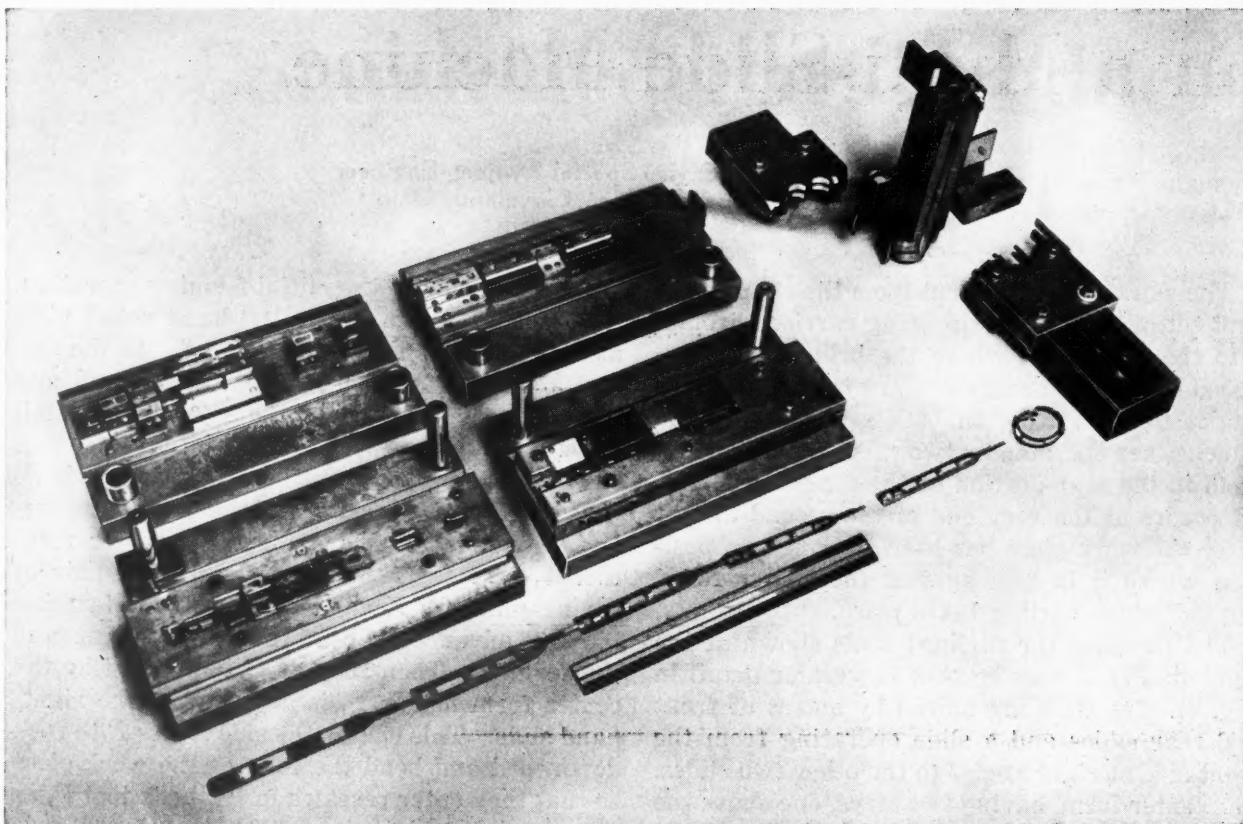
(Above) Complete tooling equipment used in producing the hose clamp. The two-level forming tools used to produce the final shape are shown at the right. In the foreground is seen strip as it appears in successive stages and after the part has been cut off
